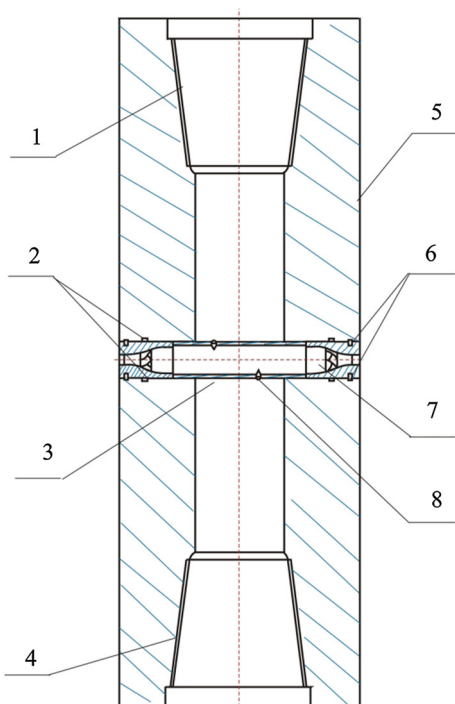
Structure design of the tool. 1 upper box joint, 2 check ring, 3 hydraulic energy distribution device, 4 lower box joint, 5 main body, 6 seal assembly, 7 swirling jet nozzle, 8 relief-hole
